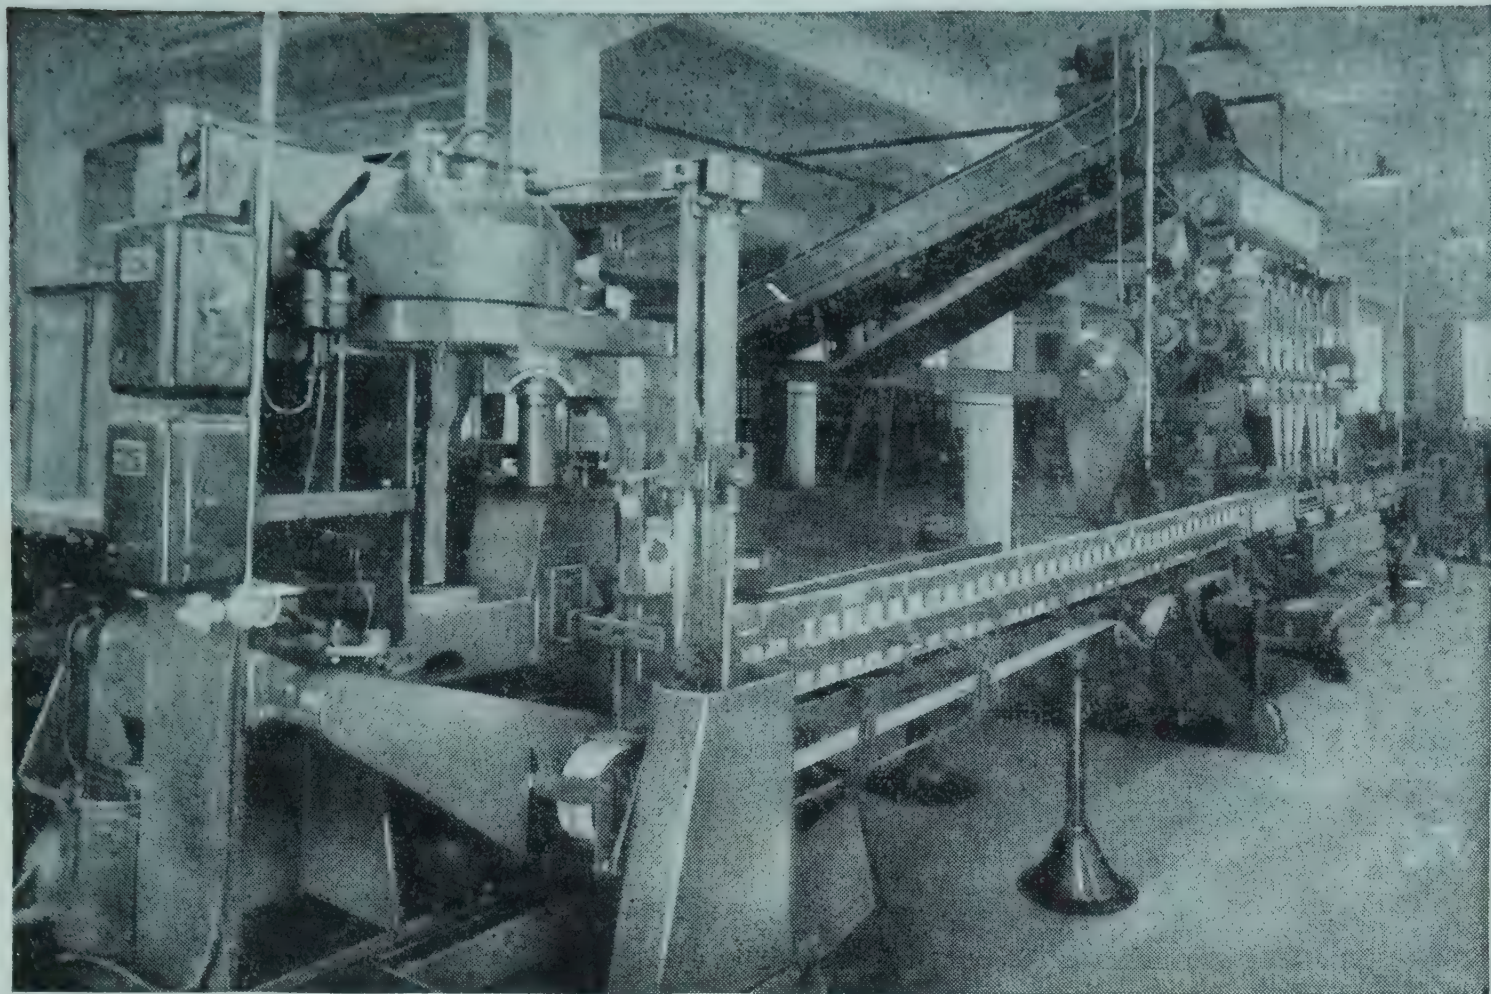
Raisin-packaging line. *Left:* Carton-forming machine. *Right:* Filling spouts. Peloian Packing Co., Dinuba, Calif. (*Modern Packaging.*)
